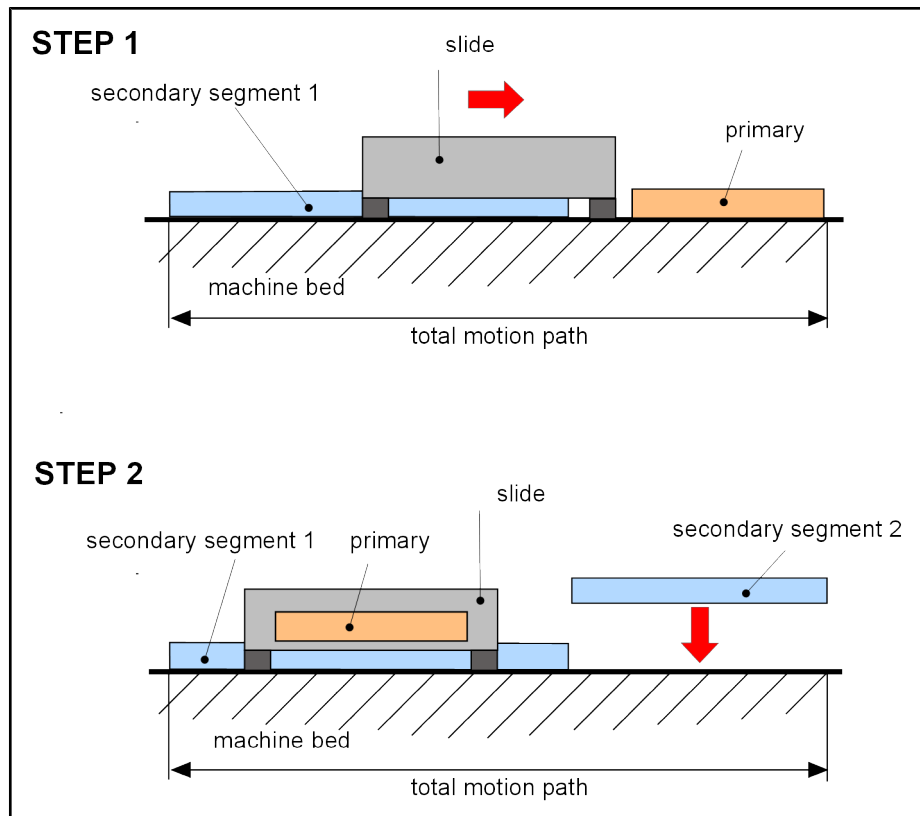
Assembly of the components of linear motors at spanned secondary part
